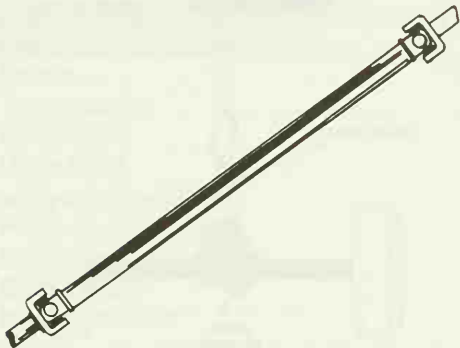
The drive shaft transfers power from the transmission to the differential assembly.
